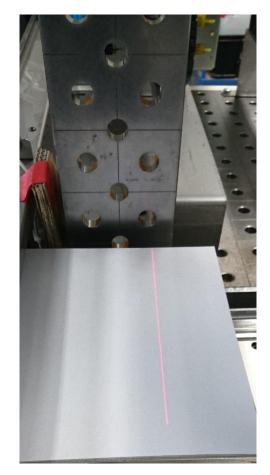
Laser Sensor with linear table in position. Figure 30. Laser spot on the paper sheet.
